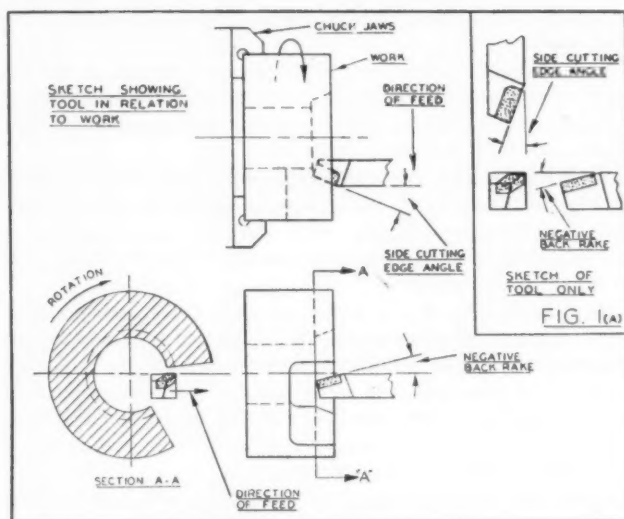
SETUP IN ENGINE LATHE SHOWING TOOL IN RELATION TO WORK
